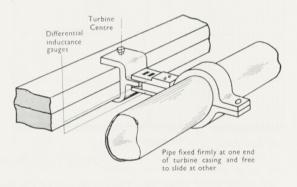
Sketch showing attachment of gauges on H.P. turbine
